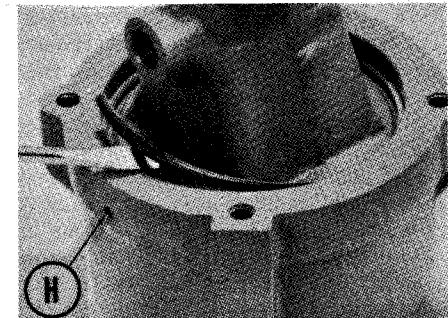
To remove cover retaining snap ring, drive pin punch through hole (H) in cover to disengage snap ring from groove.
